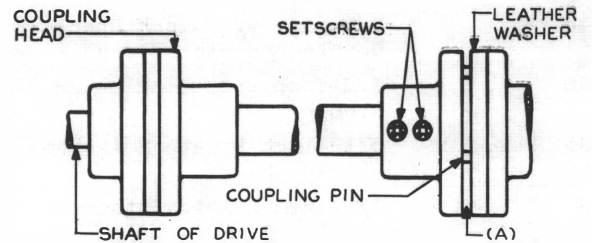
Location of Shaft Couplings of 3- and 6-type Shafts
